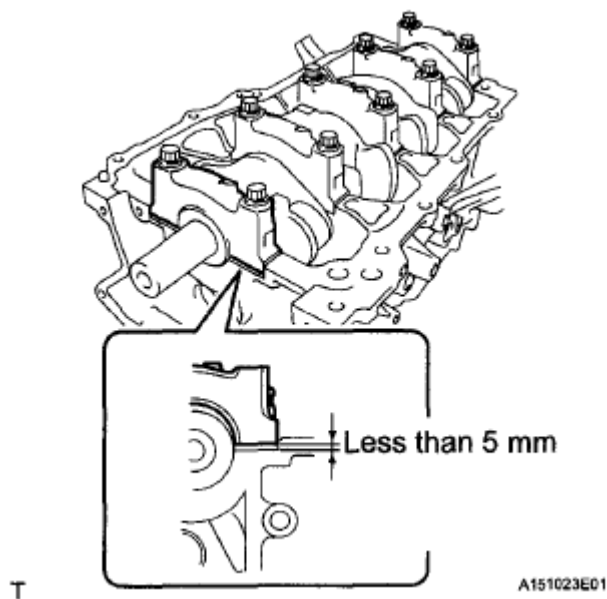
Identifying Clearance Between Main Bearing Cap And Cylinder Block
